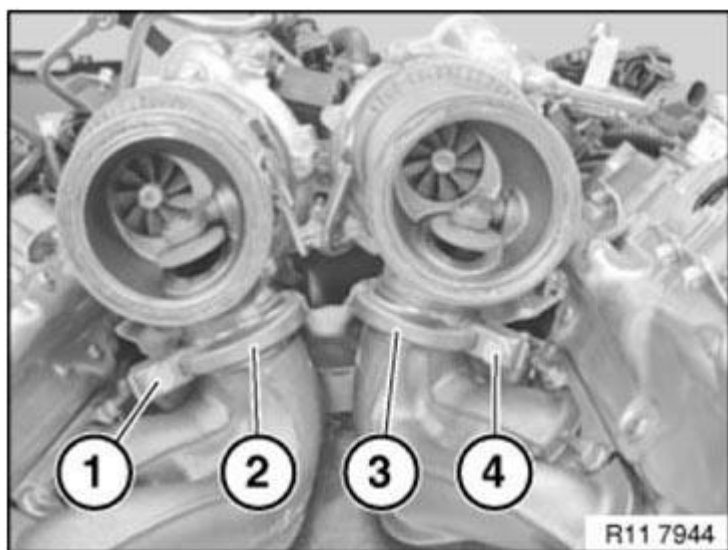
Identifying V-Band Clamp With Mounting Screws
